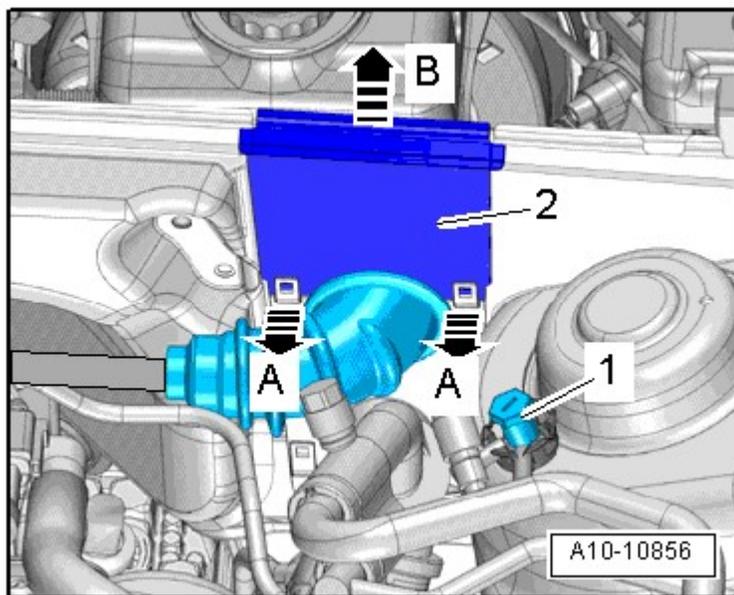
Releasing Retainers And Remove Engine Control Module
